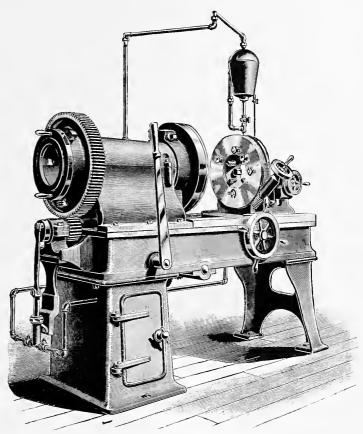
JARECKI POWER MACHINE, No. 9.
